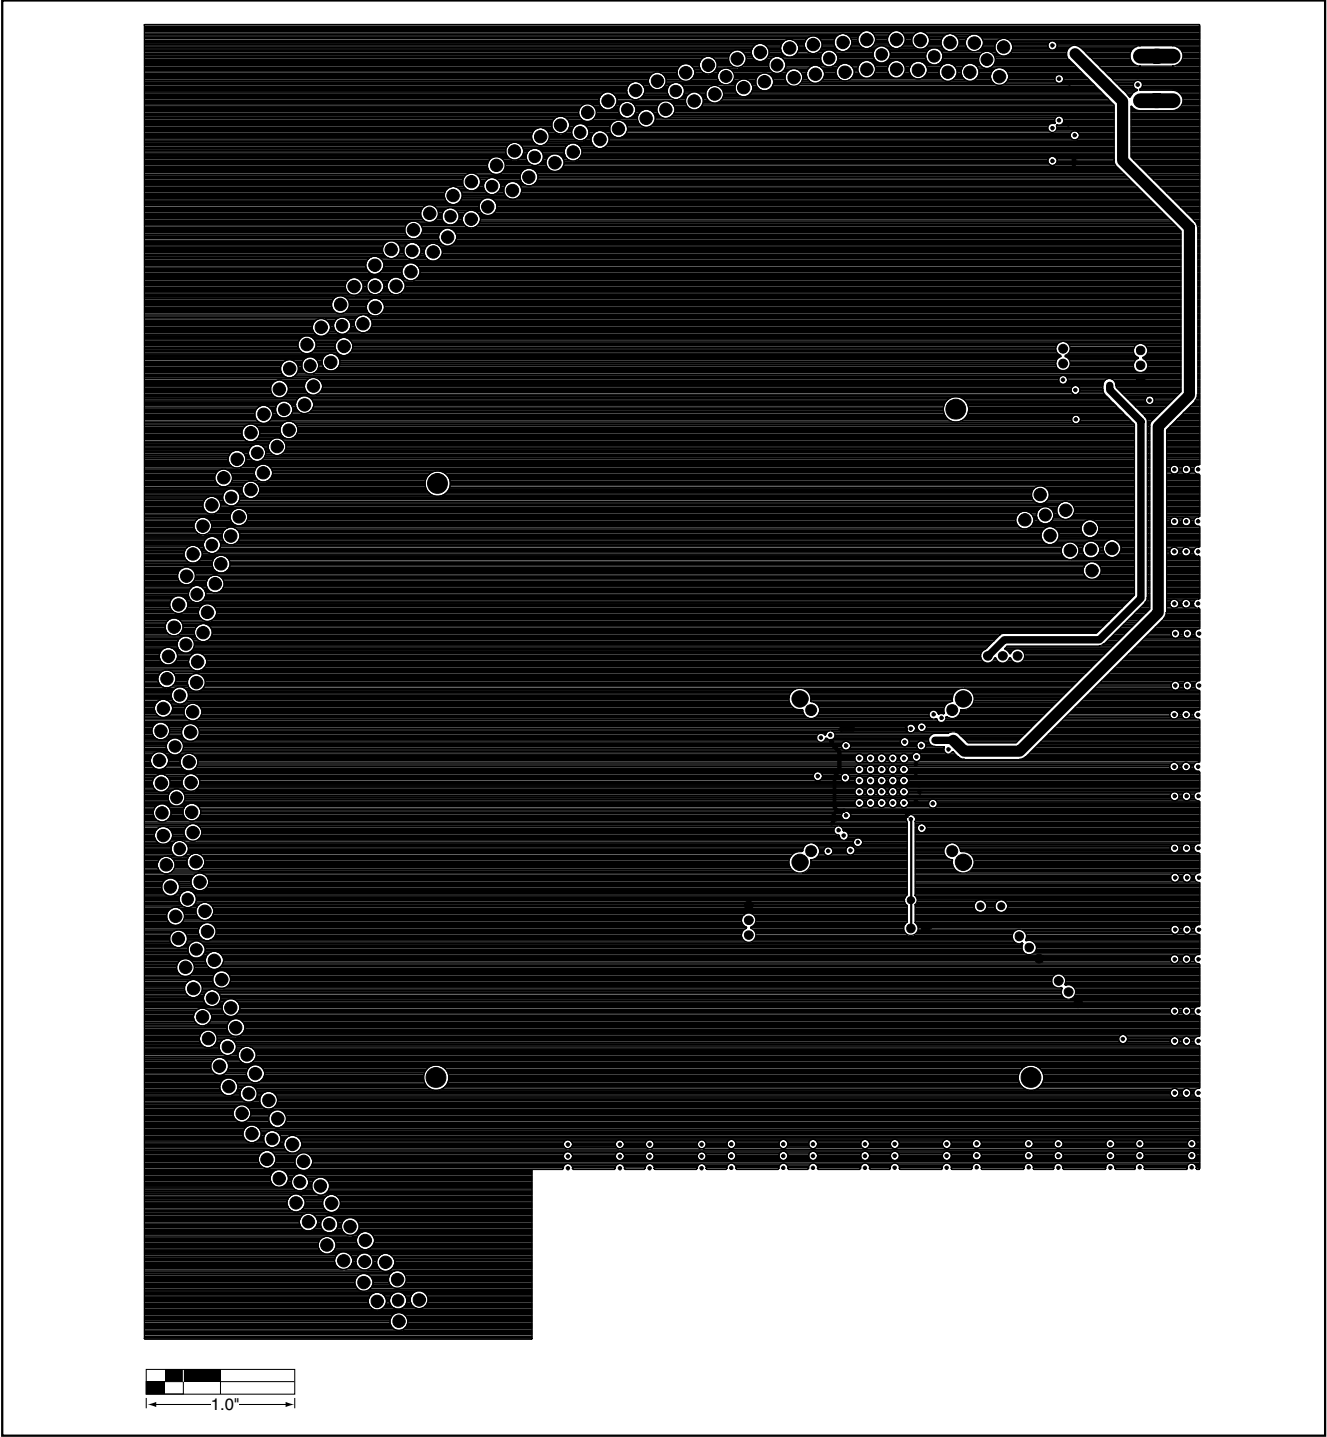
MAX3780 EV Kit PC Board Layout—Power Plane
